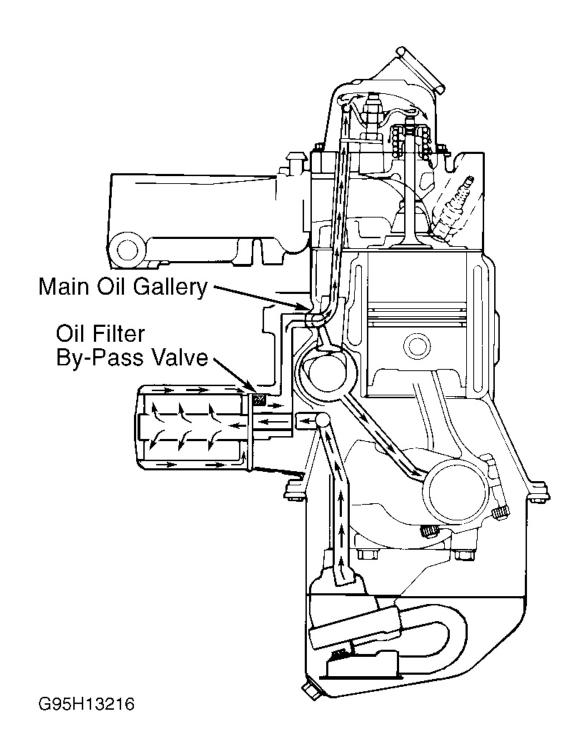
Cross-Sectional View Of Engine Oil Circuit (Typical) Courtesy of GENERAL MOTORS CORP.
